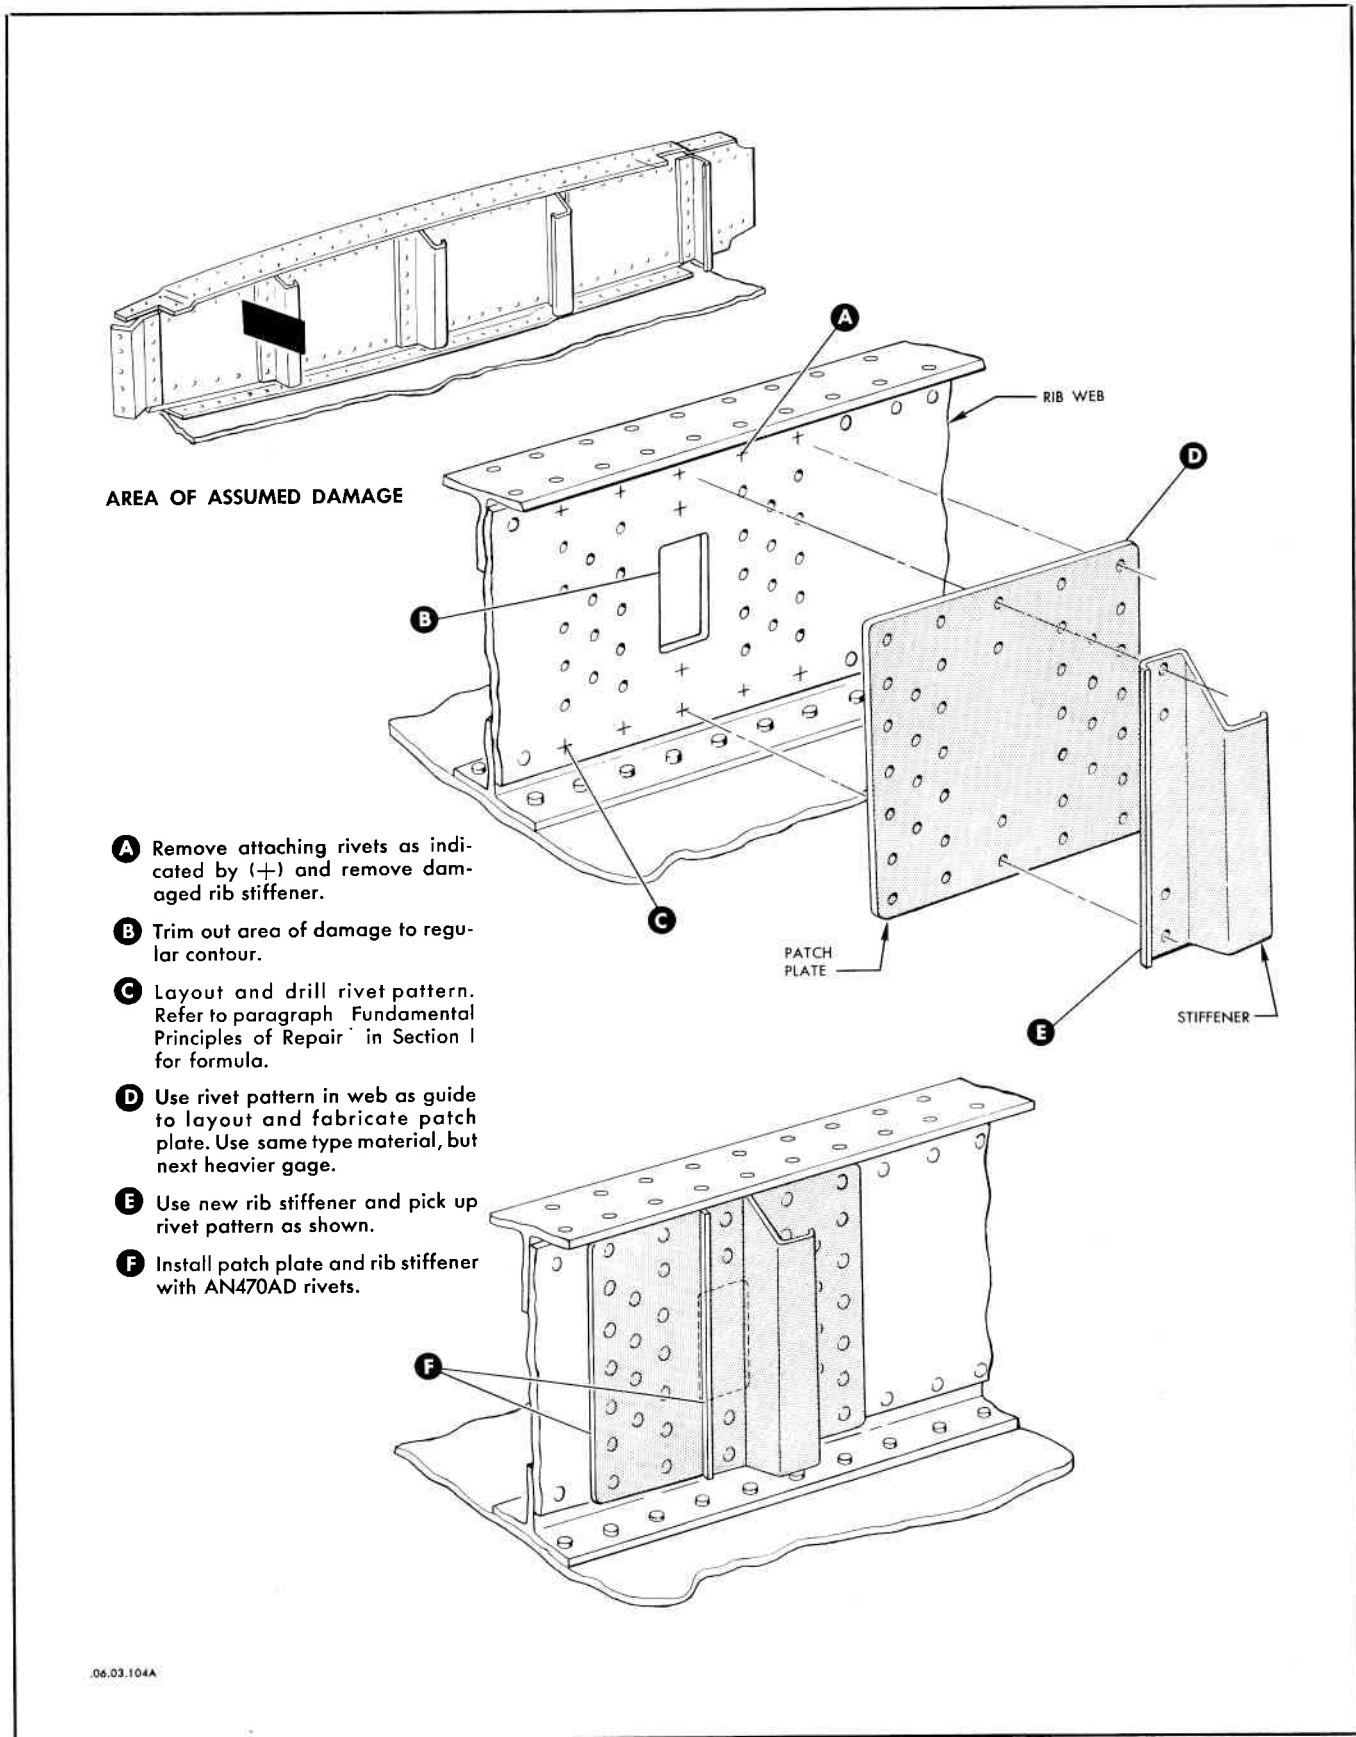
Wing Rib Repair — Intermediate Box Area
